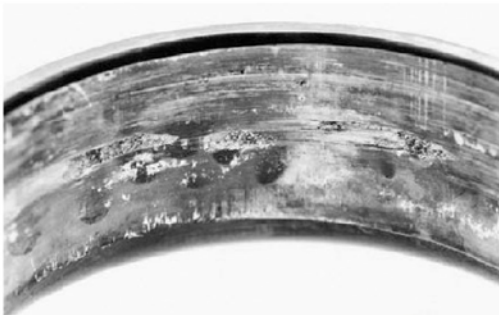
Seizing marks in the inner ring bore as a result of inner ring creeping on the shaft – FAG Publ. No. WL 82 102/2 ED
